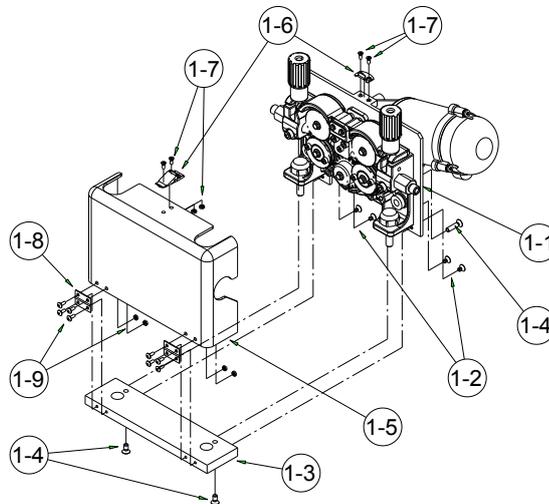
Exploded diagram of assembly parts (L11236C00)
